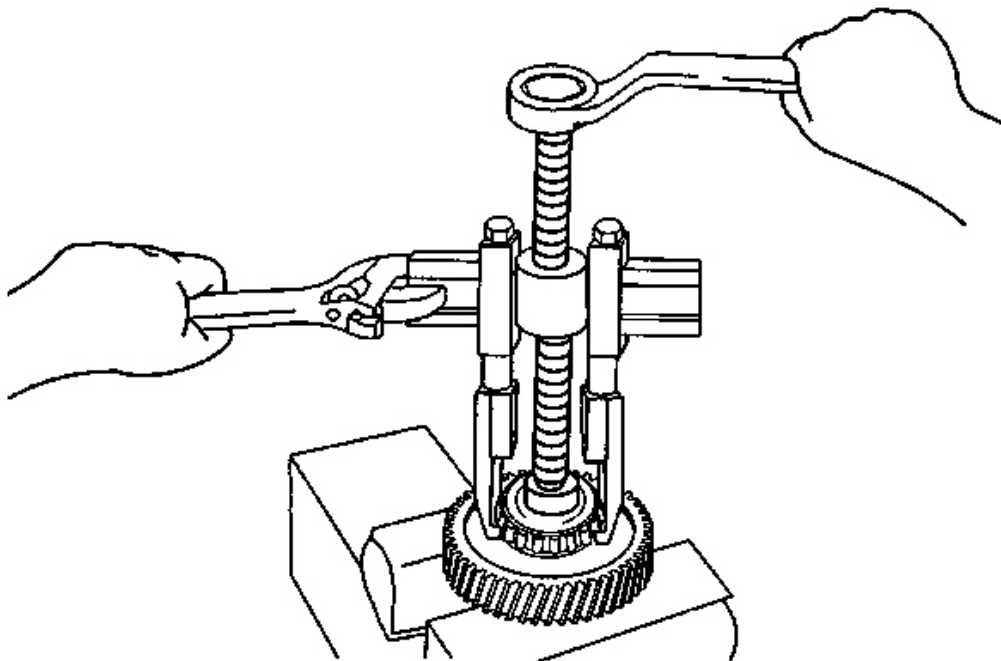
Removing Tapered Roller Bearing From Transaxle Case Side Using A Puller
